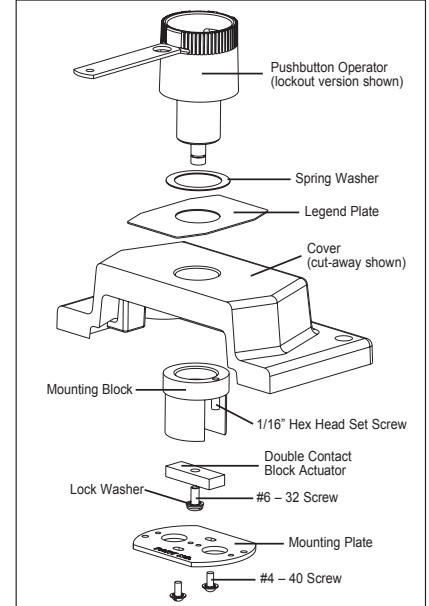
Assembly of Single Pushbutton Operator with Two Contact Blocks
